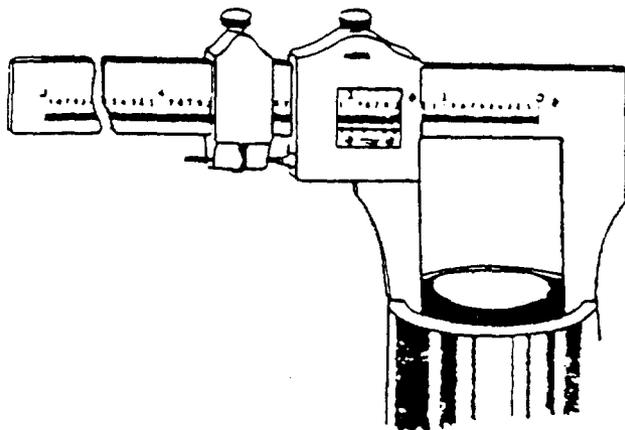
Taking an inside measurement with a vernier caliper.
